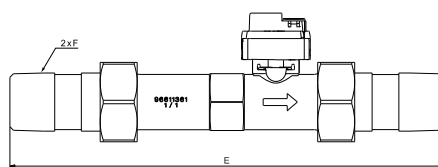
Dimensions, VFS, 10-200 l/min, with adapters
